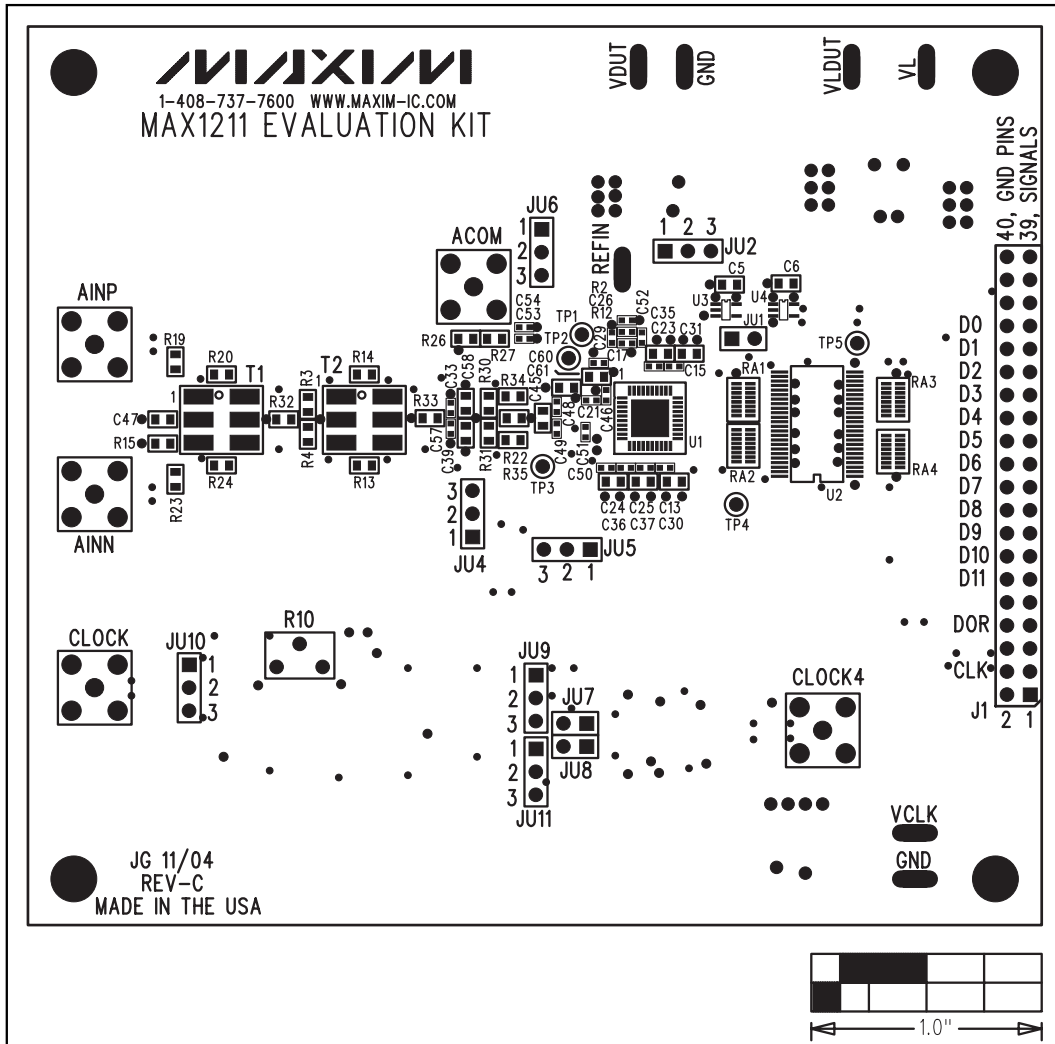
MAX1211 EV Kit Component Placement Guide—Component Side
